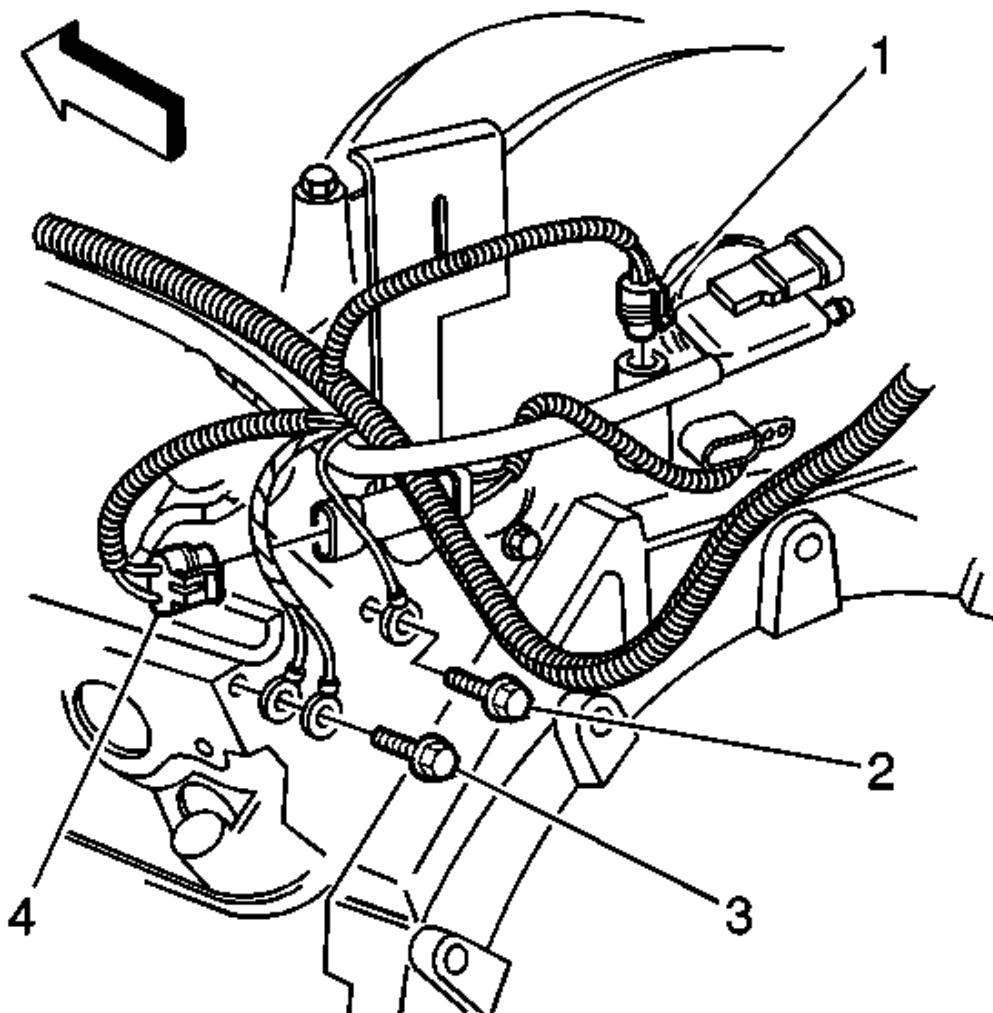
View Of Oil Pressure Sensor Electrical Connector & Engine Wiring Harness Ground Bolts
